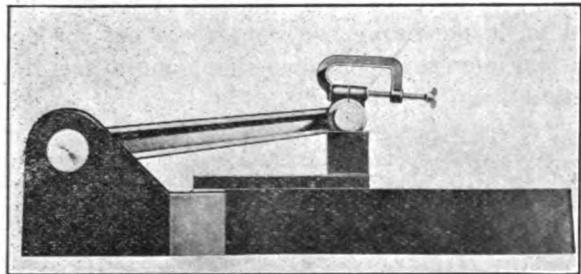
Jig for Checking Up the Trueness of Connecting Rod and Wrist Pin Bearings.
